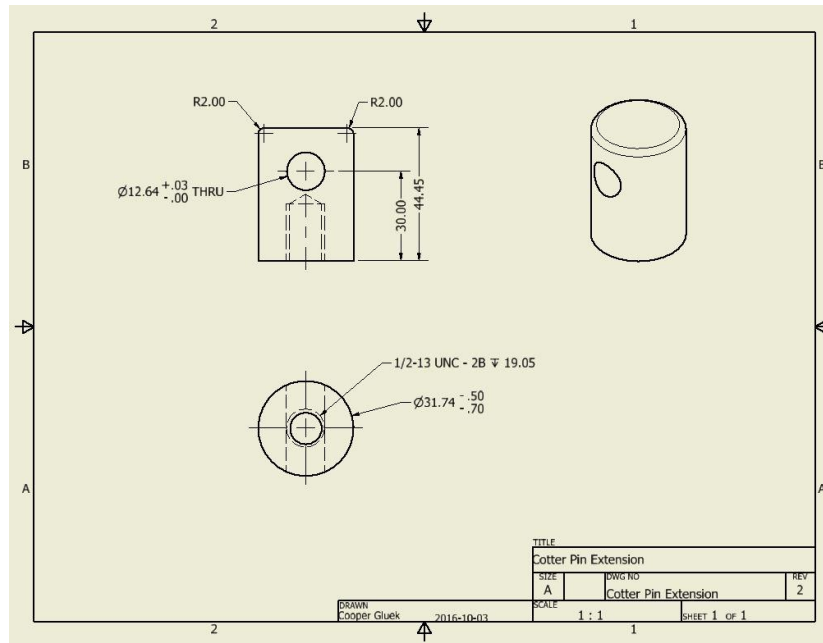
Dimensional Drawing of Cotter Pin Extension
